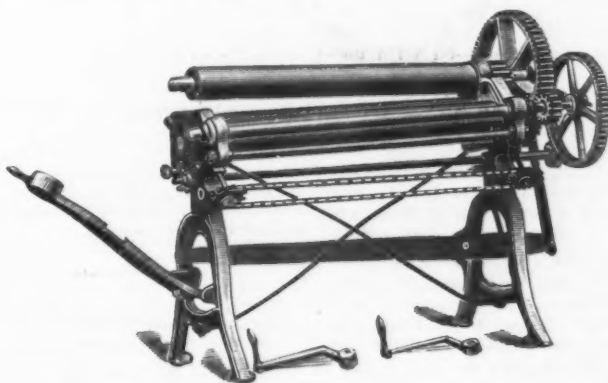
Rear View, Showing Chain and Double Back Gear.
